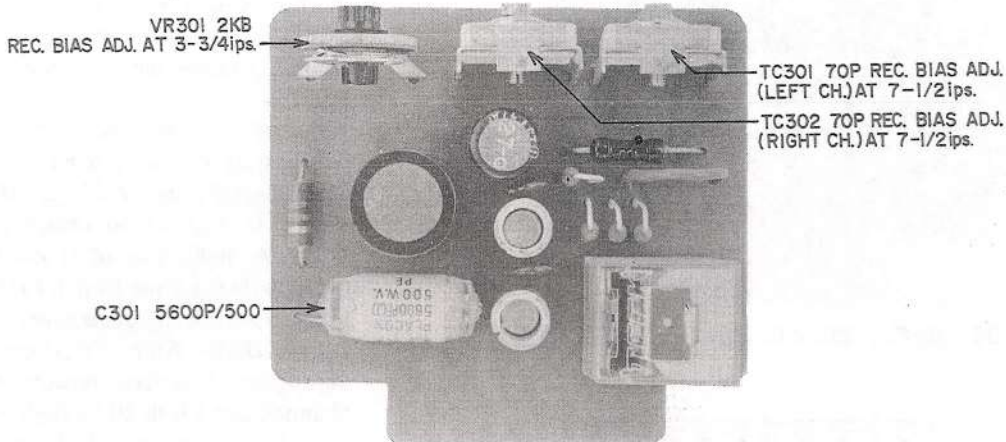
OSC. P.C. BOARD (FACE SIDE)
